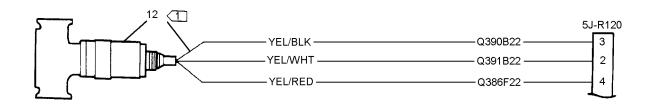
No. 4 Fuel Tank Transfer Control Valve (5L-R167) (Sheet 2)
